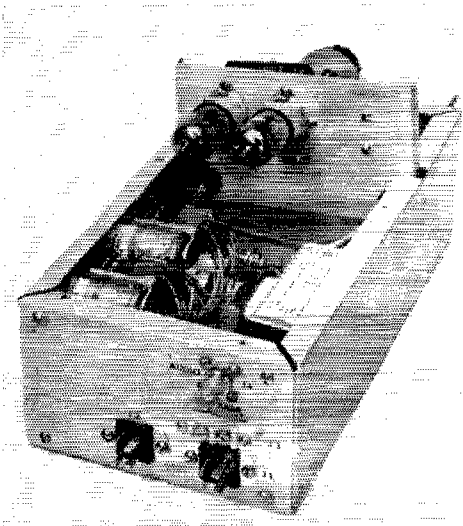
The subchassis is mounted through slots cut in the chassis lip and held in place with sheet metal screws.
